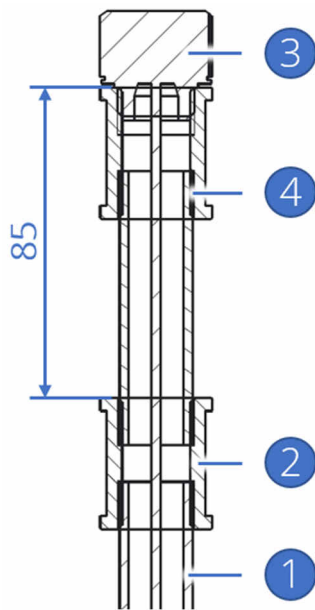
mechanical oil dipstick – installation angle 34,1° bis 35,6°
